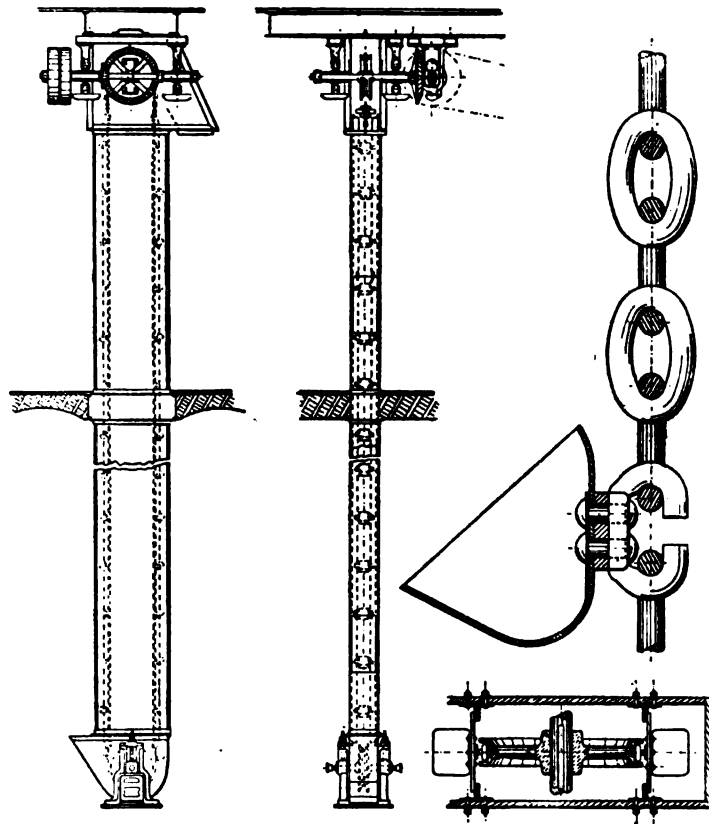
General Arrangements of Cable-chain Elevator, showing Driving and Tightening Gear.
